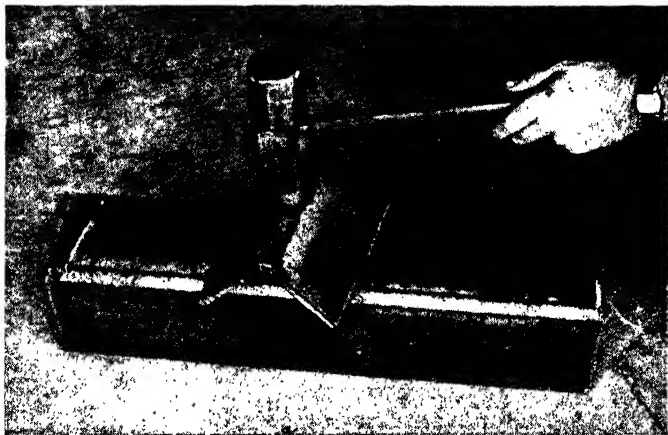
A heavy press or an expensive testing machine is not needed to see the inside of test welds. A test piece can be broken with a hammer to reveal many important details about the weld. (Courtesy of R. G. LeTourneau, Inc.)
